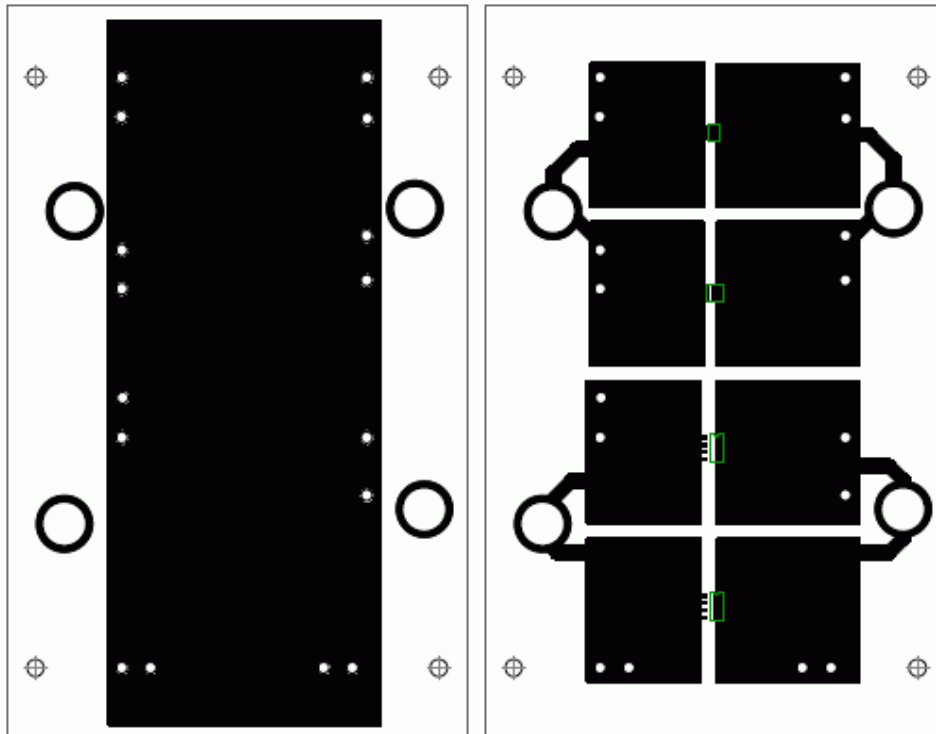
25 mm Test Board Layout Top and Bottom Copper Artwork
